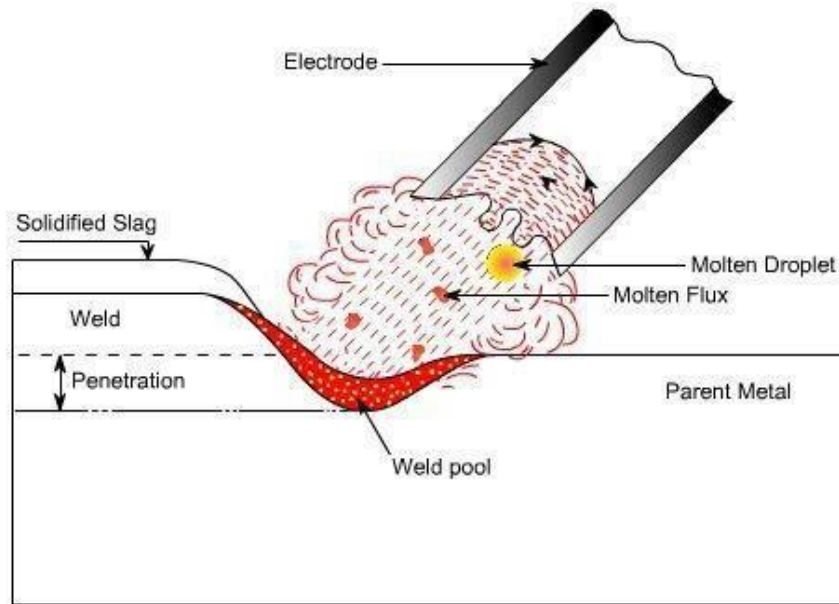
Molten Metal and Flux Transfer to Weld Pool
